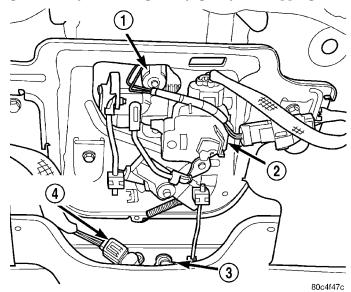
LIFTGATE CYLINDER LOCK SWITCH LOCATION
